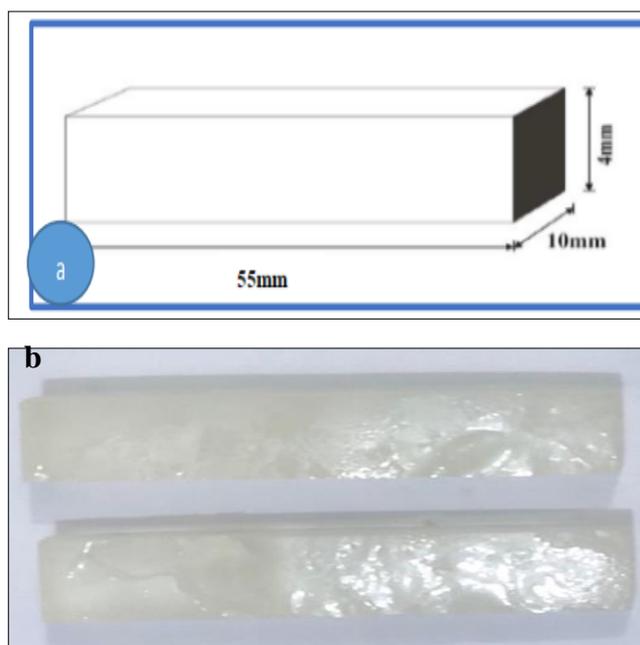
a) Represent the standard dimensions of impact test specimen and b) experimental impact test specimen.
